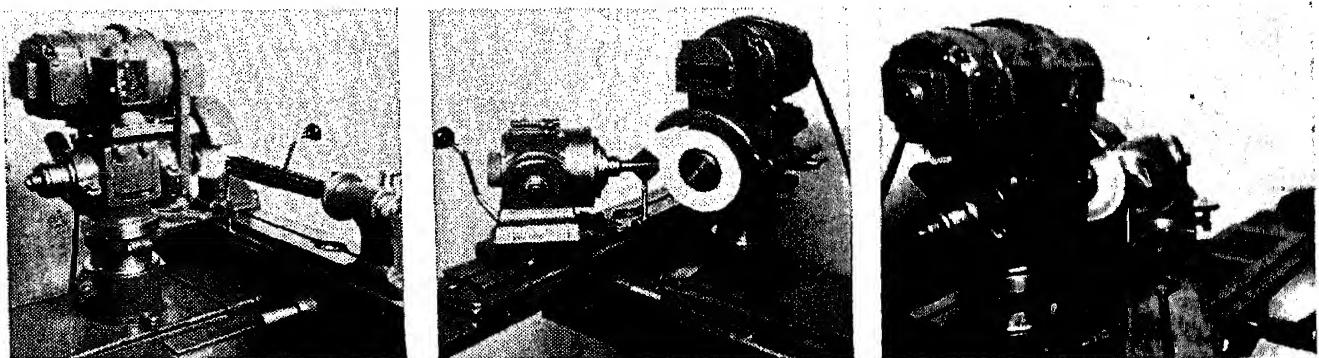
Set ups for grinding cutters on tool and cutter grinder; a tapered reamer at left and angle cutter in middle and at right.
